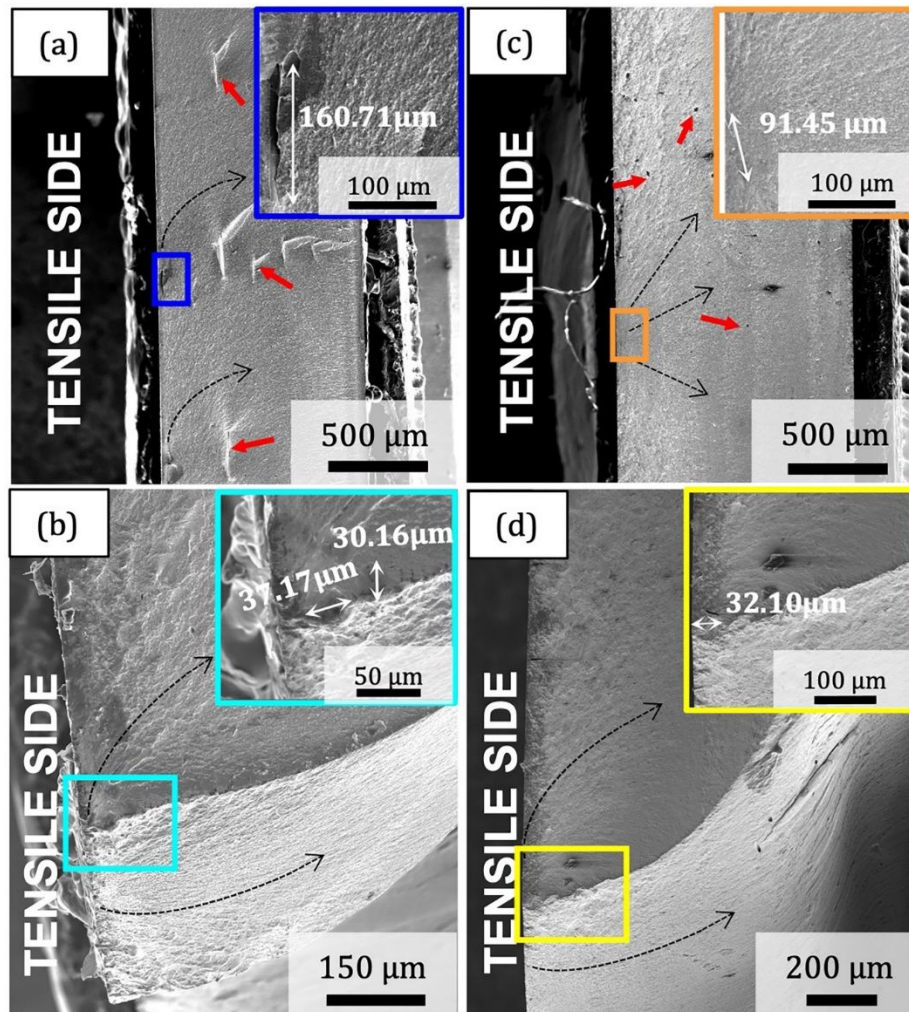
Secondary electron (SE) images of the biaxial fracture surface of 3Y-TZP discs manufactured by MEX using printing strategy 01_100_30 (a,b) and 02_110_30 (c,d). Indicative measurements of the critical flaw size.
